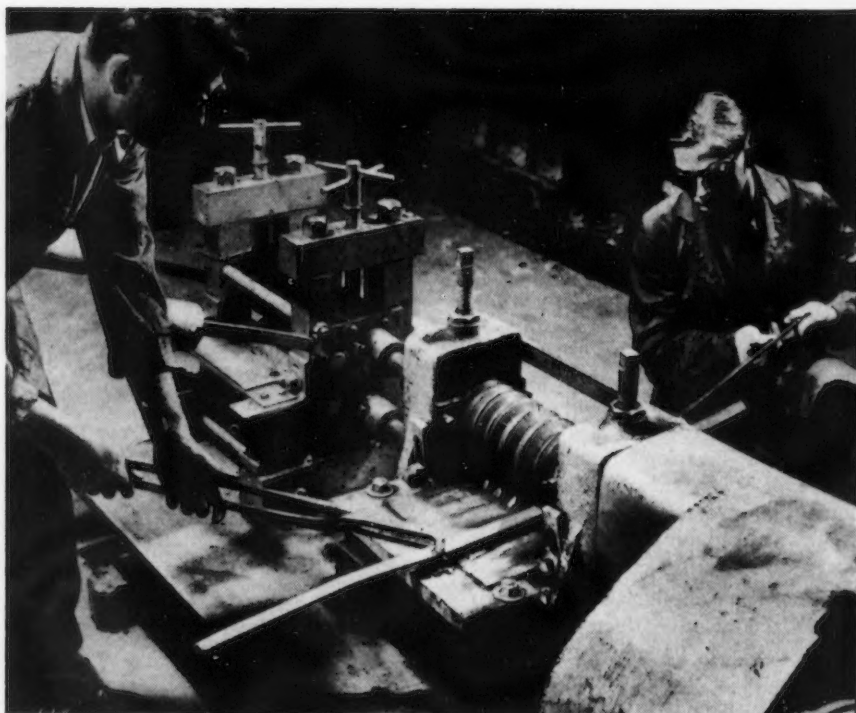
This miniature rolling mill is used to reduce bars into convenient sizes for test specimens. A gas fired heating furnace, a small soaking pit and a 500 lb. steam hammer are used in this work.
